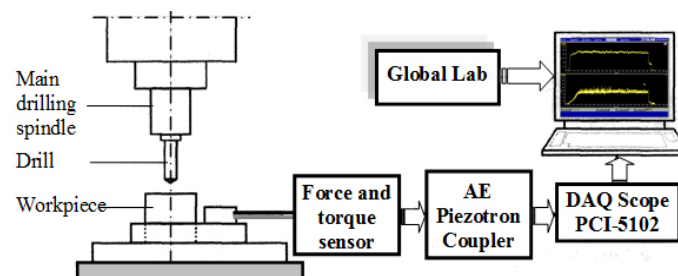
Set-up for measurement of axial force and torque in drilling [1]
